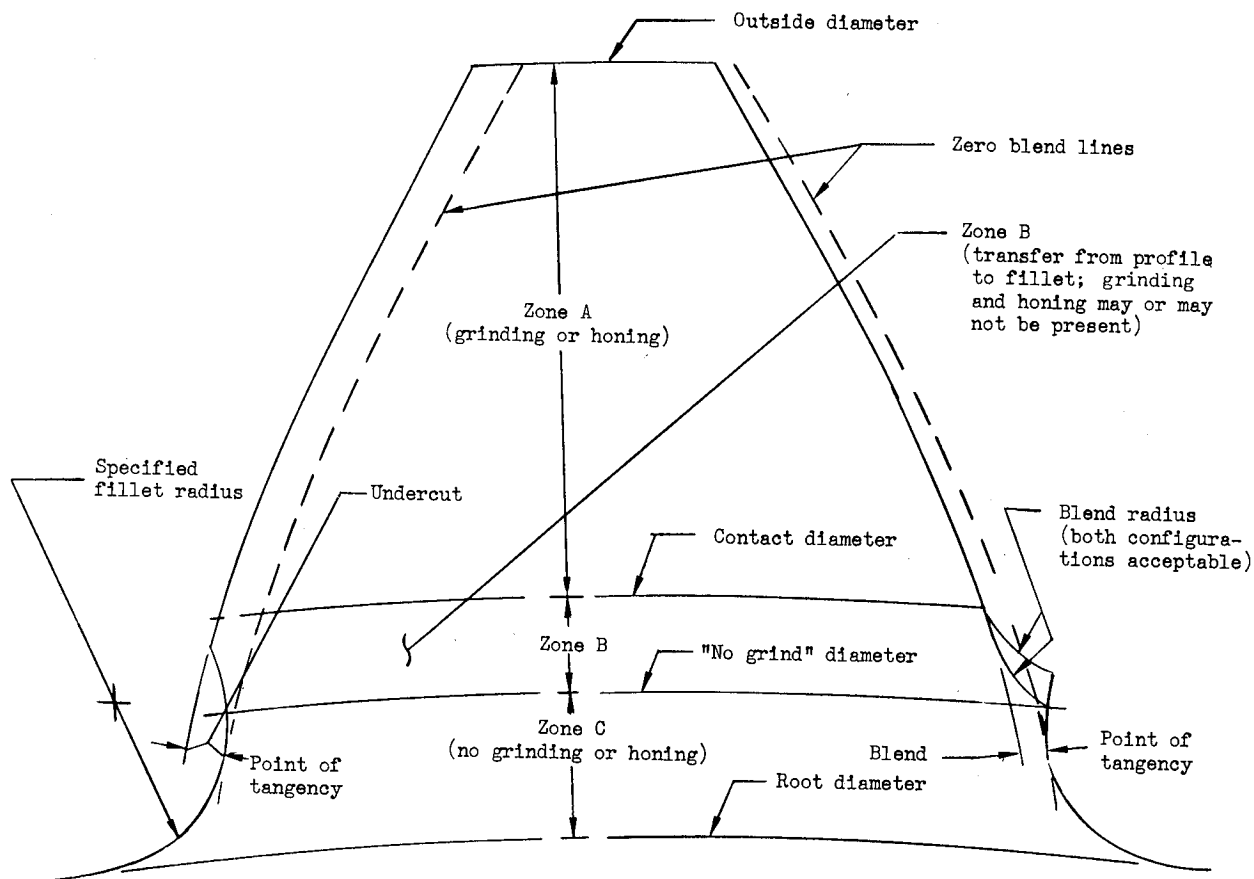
Sketch illustrating grinding zones on critical hardened gears.
